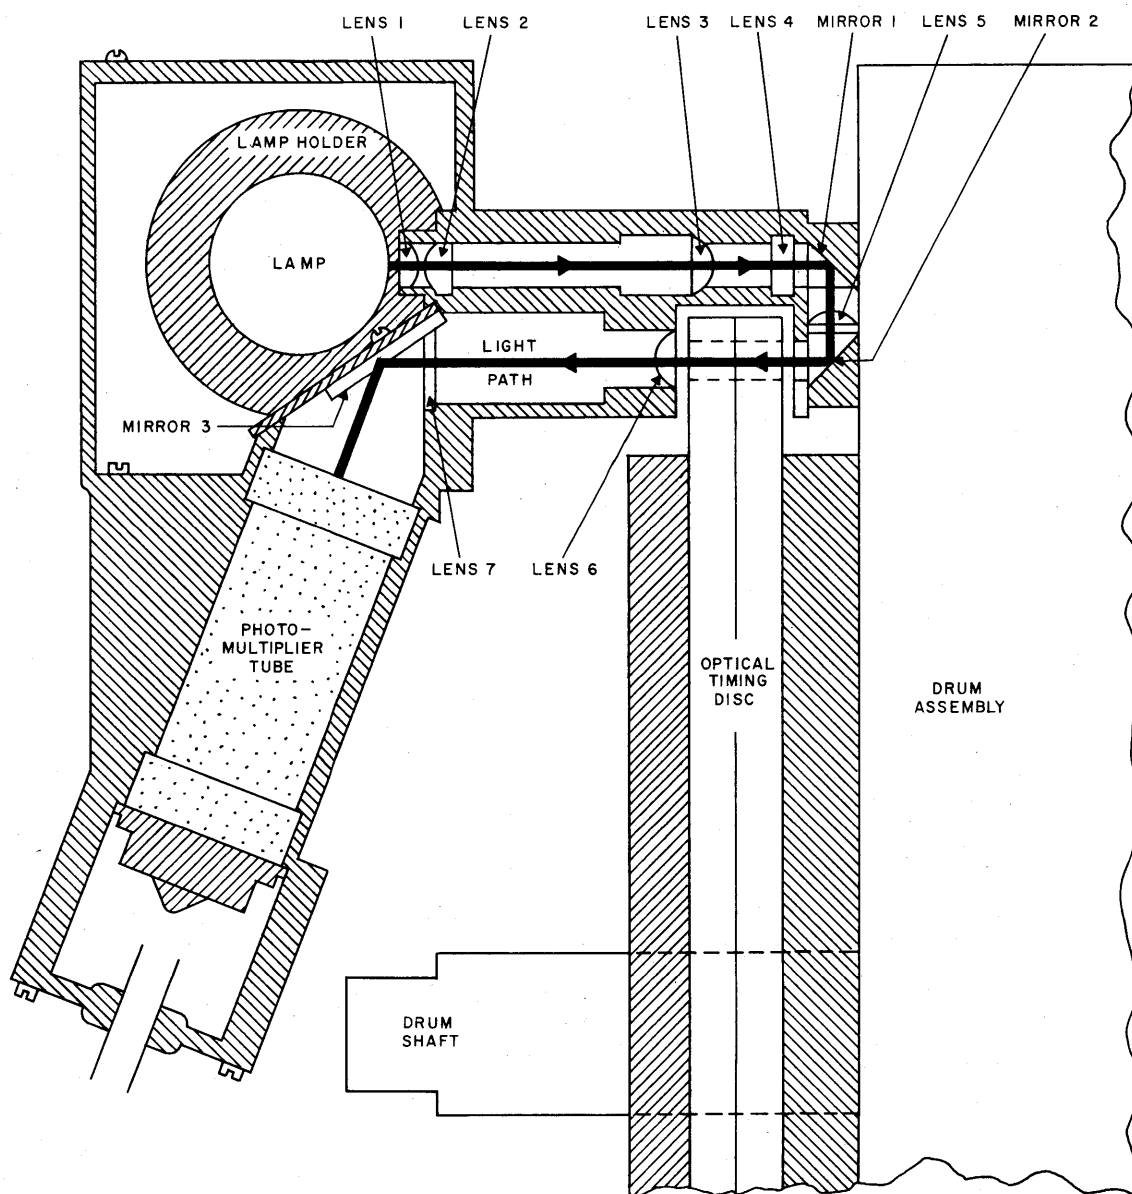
Optical Transducer and Drum Assembly, Cross-Sectional View
